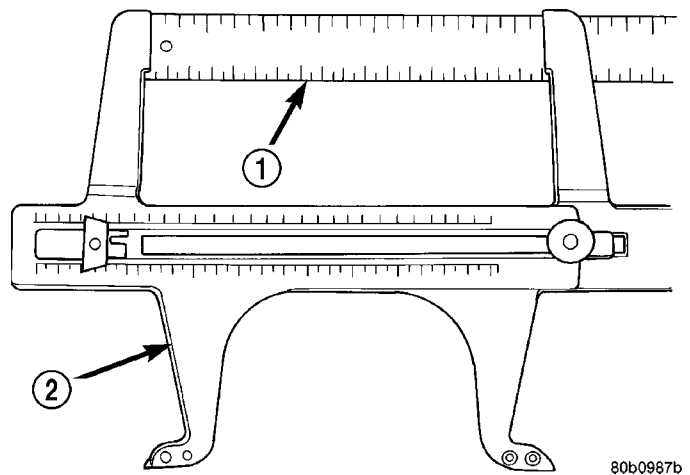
SETTING GAUGE TO PARK BRAKE SHOE MEASUREMENT
